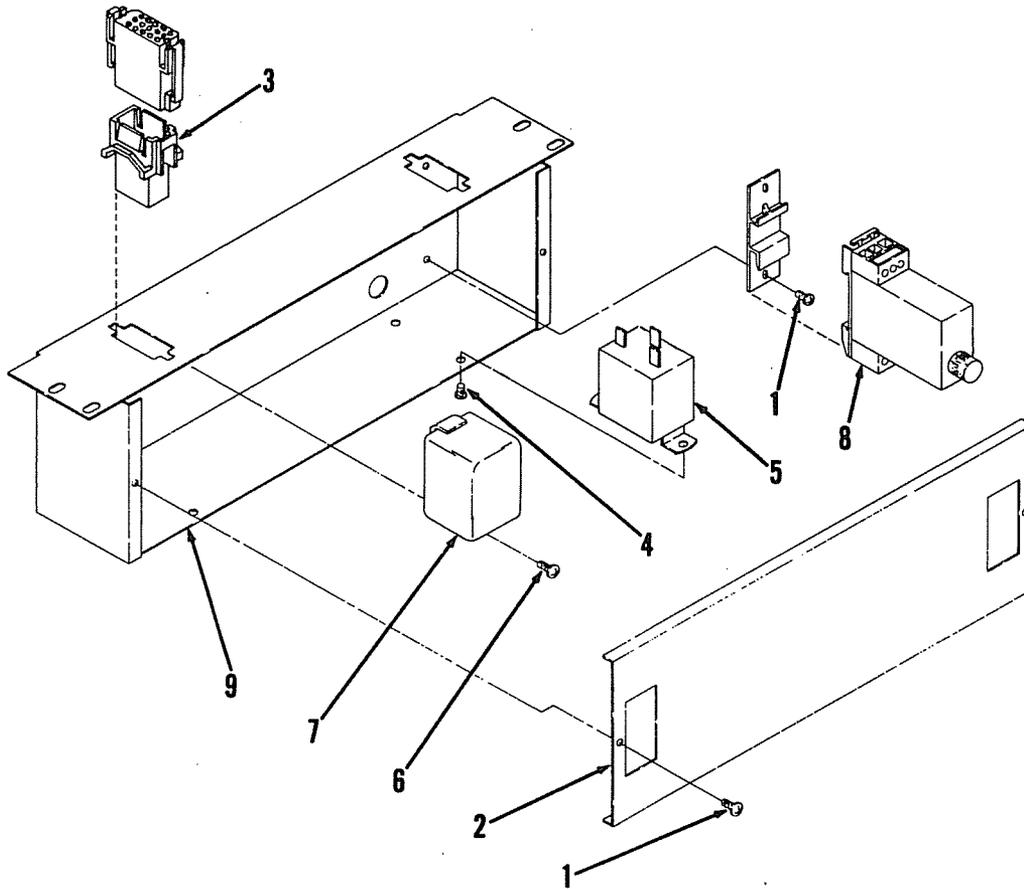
HOT GAS CONTROL BOX ASSEMBLY
